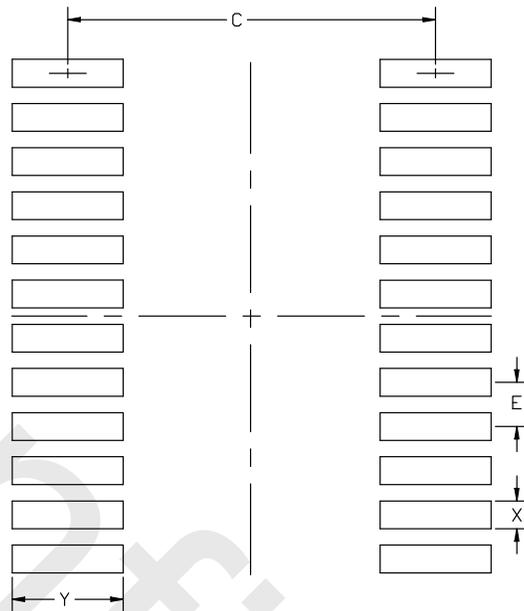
QSOP24 PCB Land Pattern Drawing
